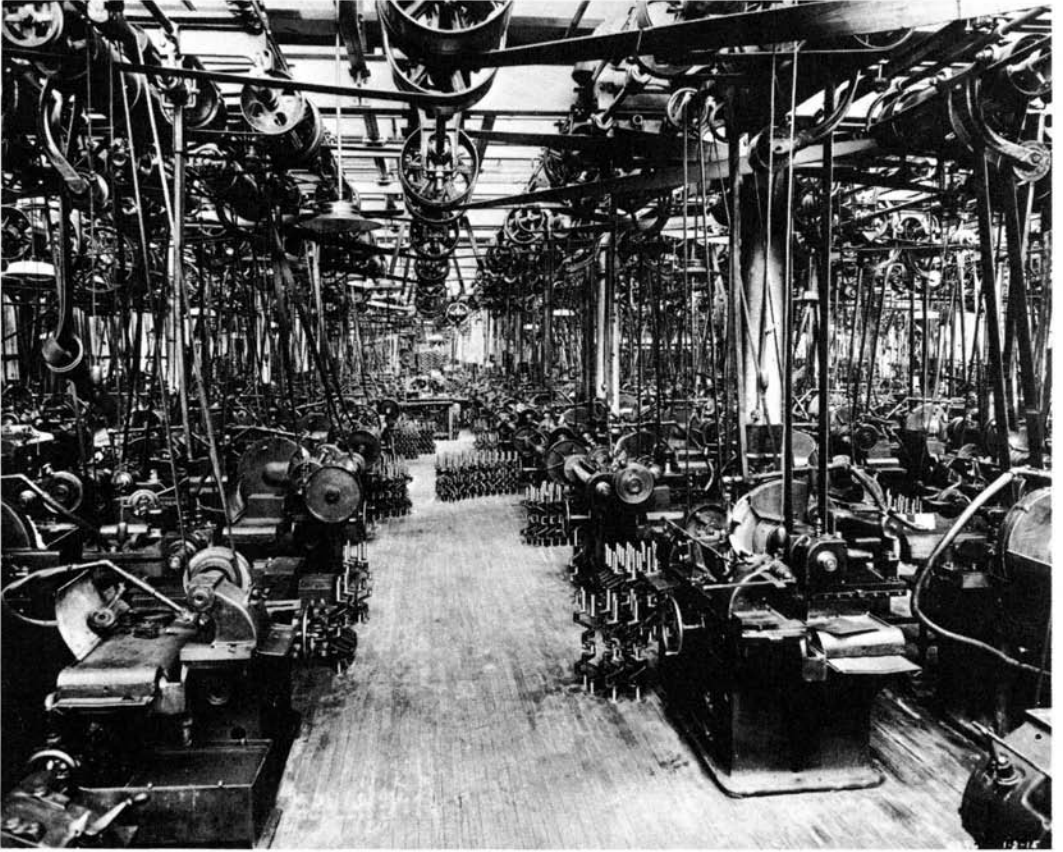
Ford Crankshaft Grinding Machines, 1915. Developments in grinding technology, such as the machinery for grinding crankshafts, played an important part in the achievement of accurately machined automobile parts. (Henry Ford Museum, The Edison Institute. Neg. No. 833-2296.)
